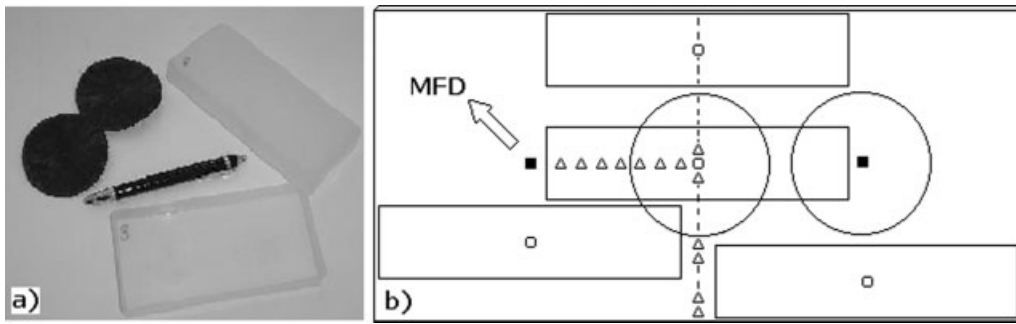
(a) Double-gated injected parts. (b) Scheme of the molding showing the location of impact test specimens (rectangular samples for tensile impact and discs for falling weight impact); weld line (–); injection points (■) and microhardness test points (△). Arrow indicates melt flow direction (MFD).
